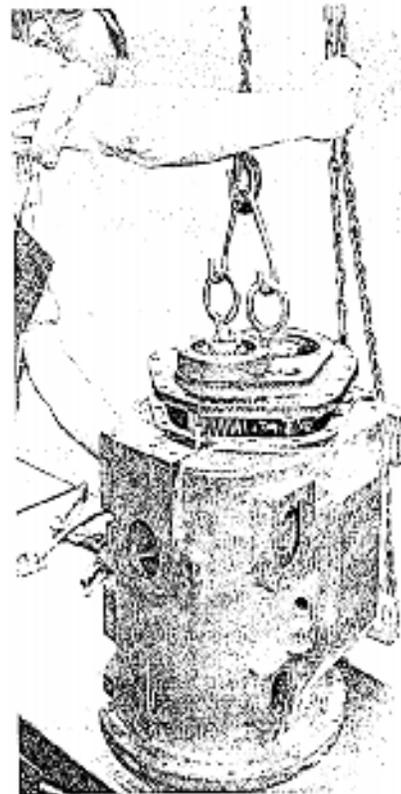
Removing Housing Cover and Pinion Shaft. Commutator should be held so pinion shaft slides freely.
